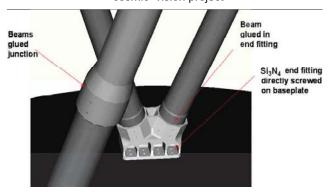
Full Si_3N_4 junction allowing a direct connection of the truss to the instrument baseplate
